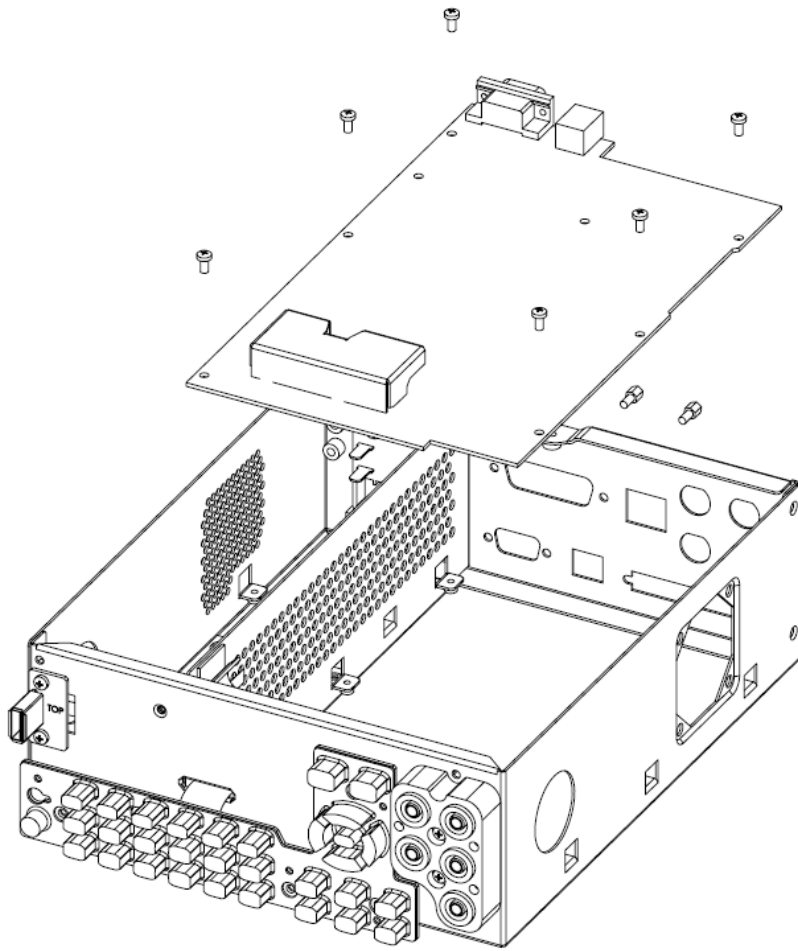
The Schematic of Disassembling and Assembling Motherboard
